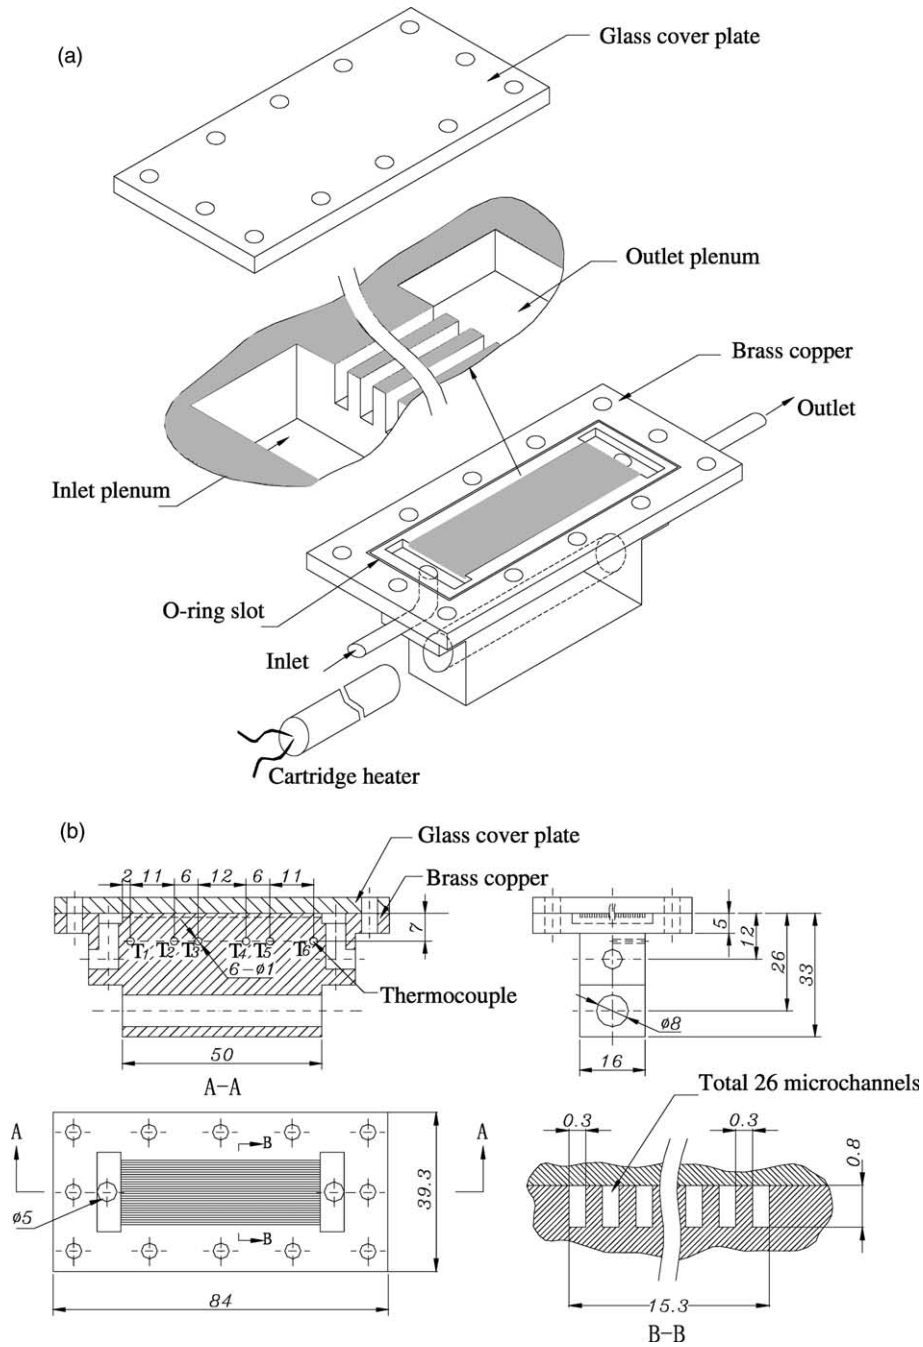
(a) Three dimensional view of the copper heat sink. (b) Detailed technical drawing of the copper heat sink.
